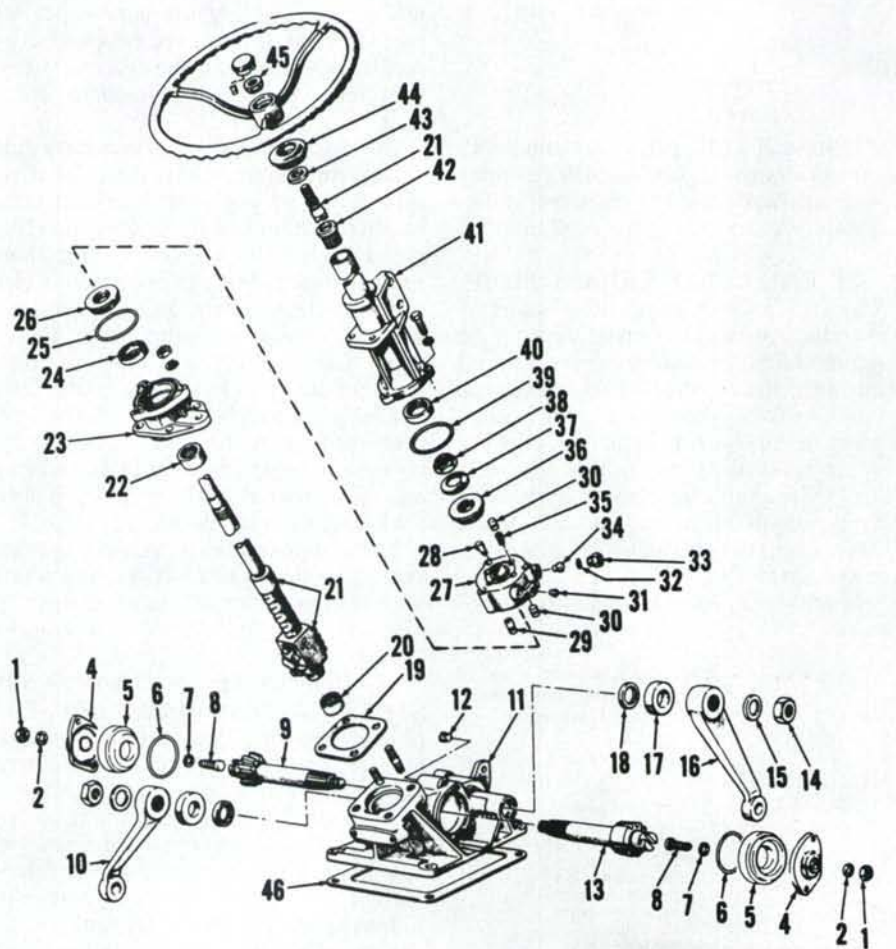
Exploded view of power steering gear and valve assembly. Turning effort on steering wheel, or reaction of front wheels through steering linkage and gears, causes wormshaft (21) to move up or down, thereby actuating the control valve (27).
